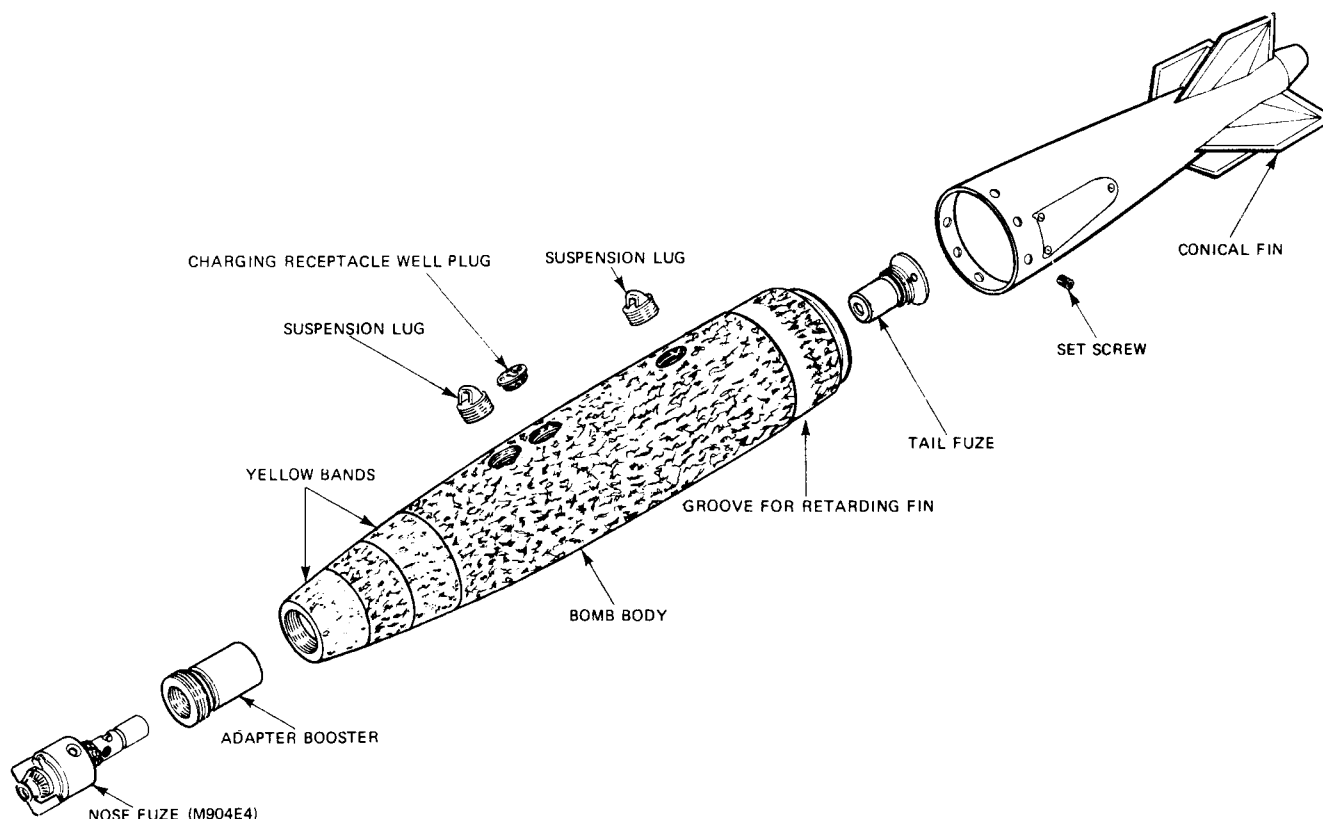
Typical Low Drag General Purpose Thermally Protected Bomb — Exploded View
